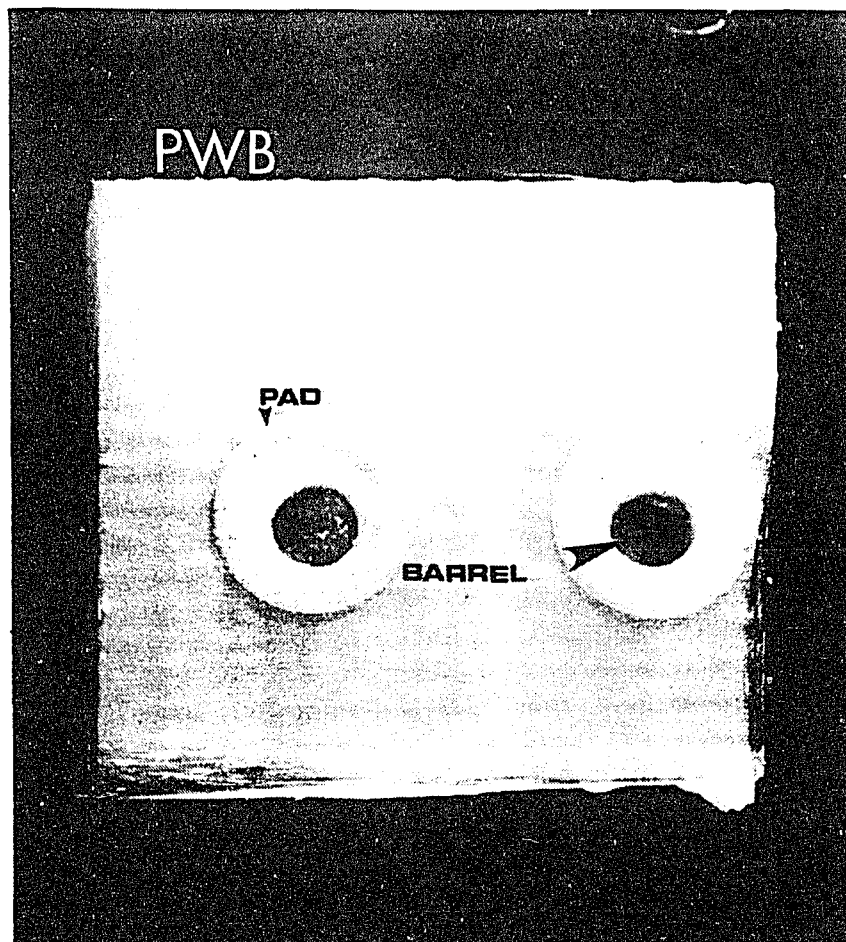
Photograph of a plated-through-hole before soldering at 10X magnification.
